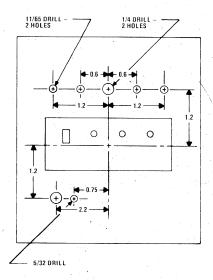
Drilling Guide for the Case Top if the PS-101 Rotary Function Switch is Used. (Dimensions in inches.)
